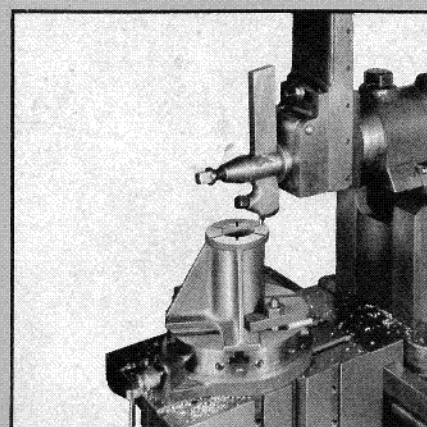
shows the 3" x 2" x 2" ANGLE PLATE which is mounted on either the side or top of the table. This plate is very useful when working on odd shaped pieces that cannot be held in the vise.
